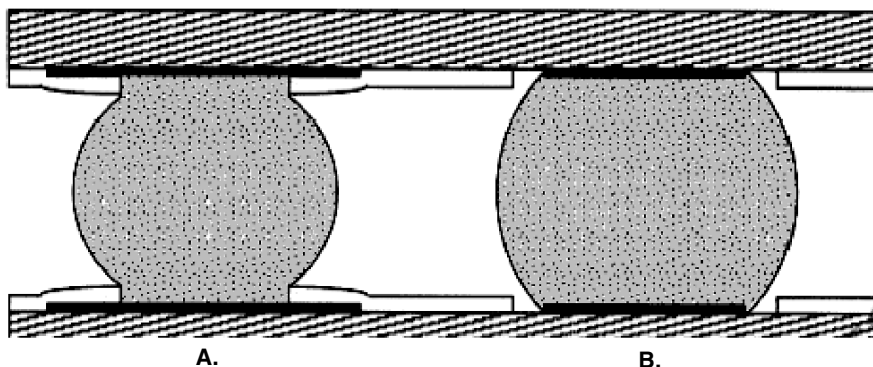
A comparison of the microcoupler's solder joints. "A" shows a solder-mask defined pad, and "B" shows a non-solder mask defined pad.
